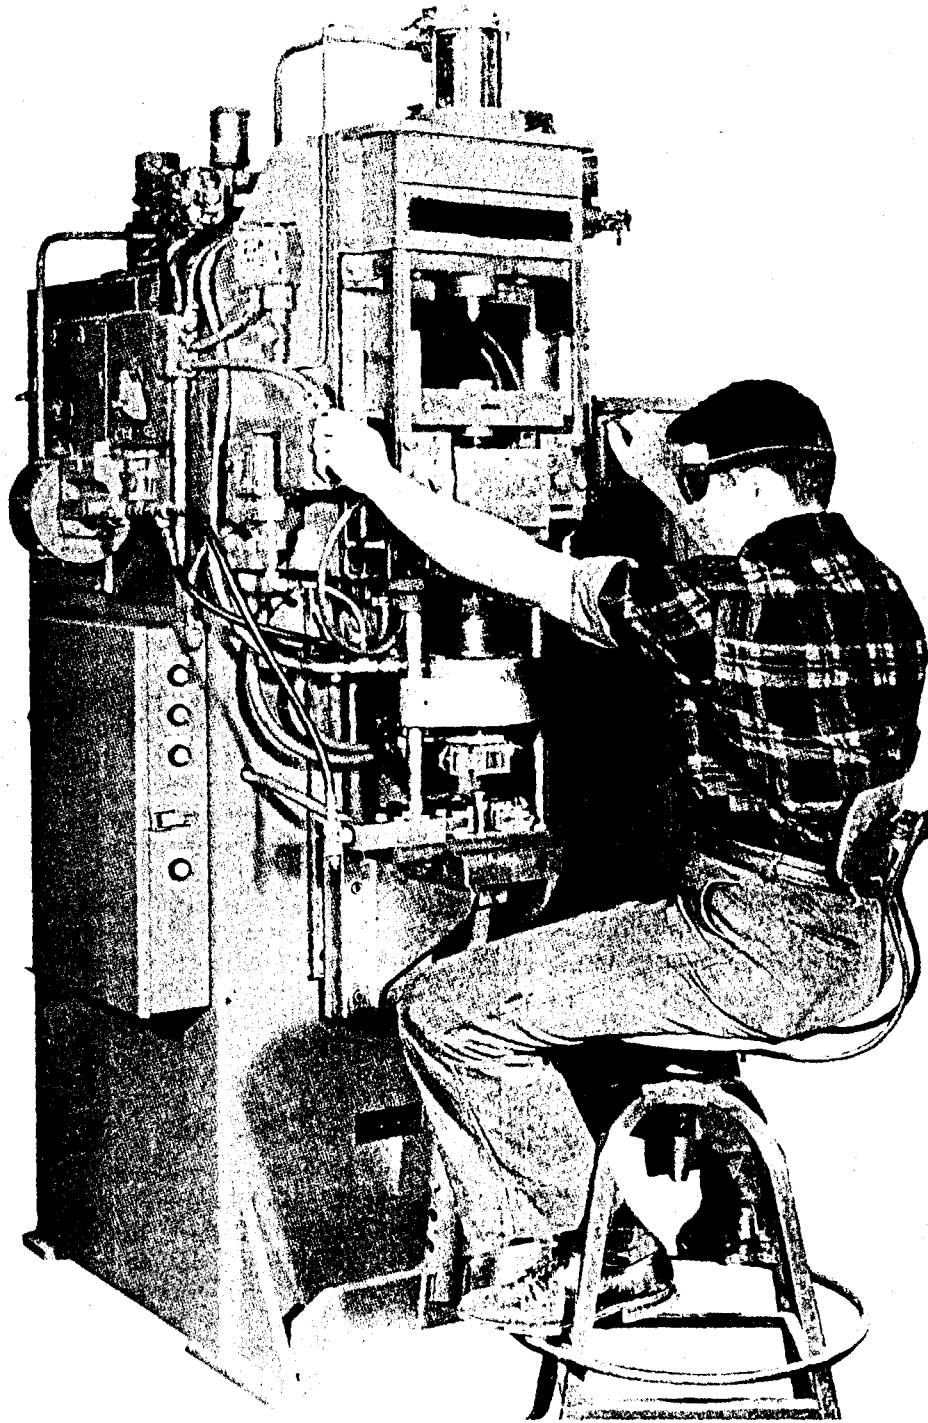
Magnetic Force Percussion Welding Machine
